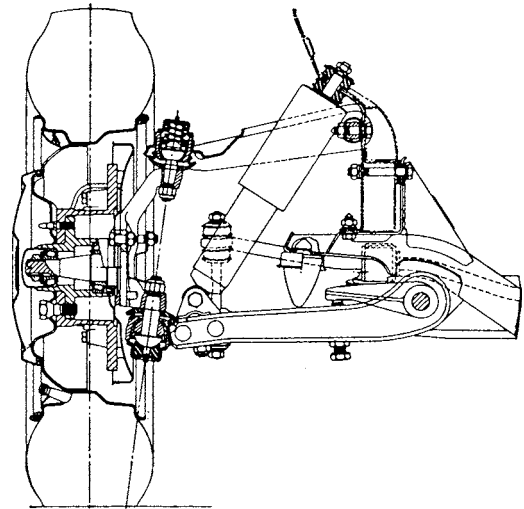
Front-wheel suspension for rear-wheel-drive car.
